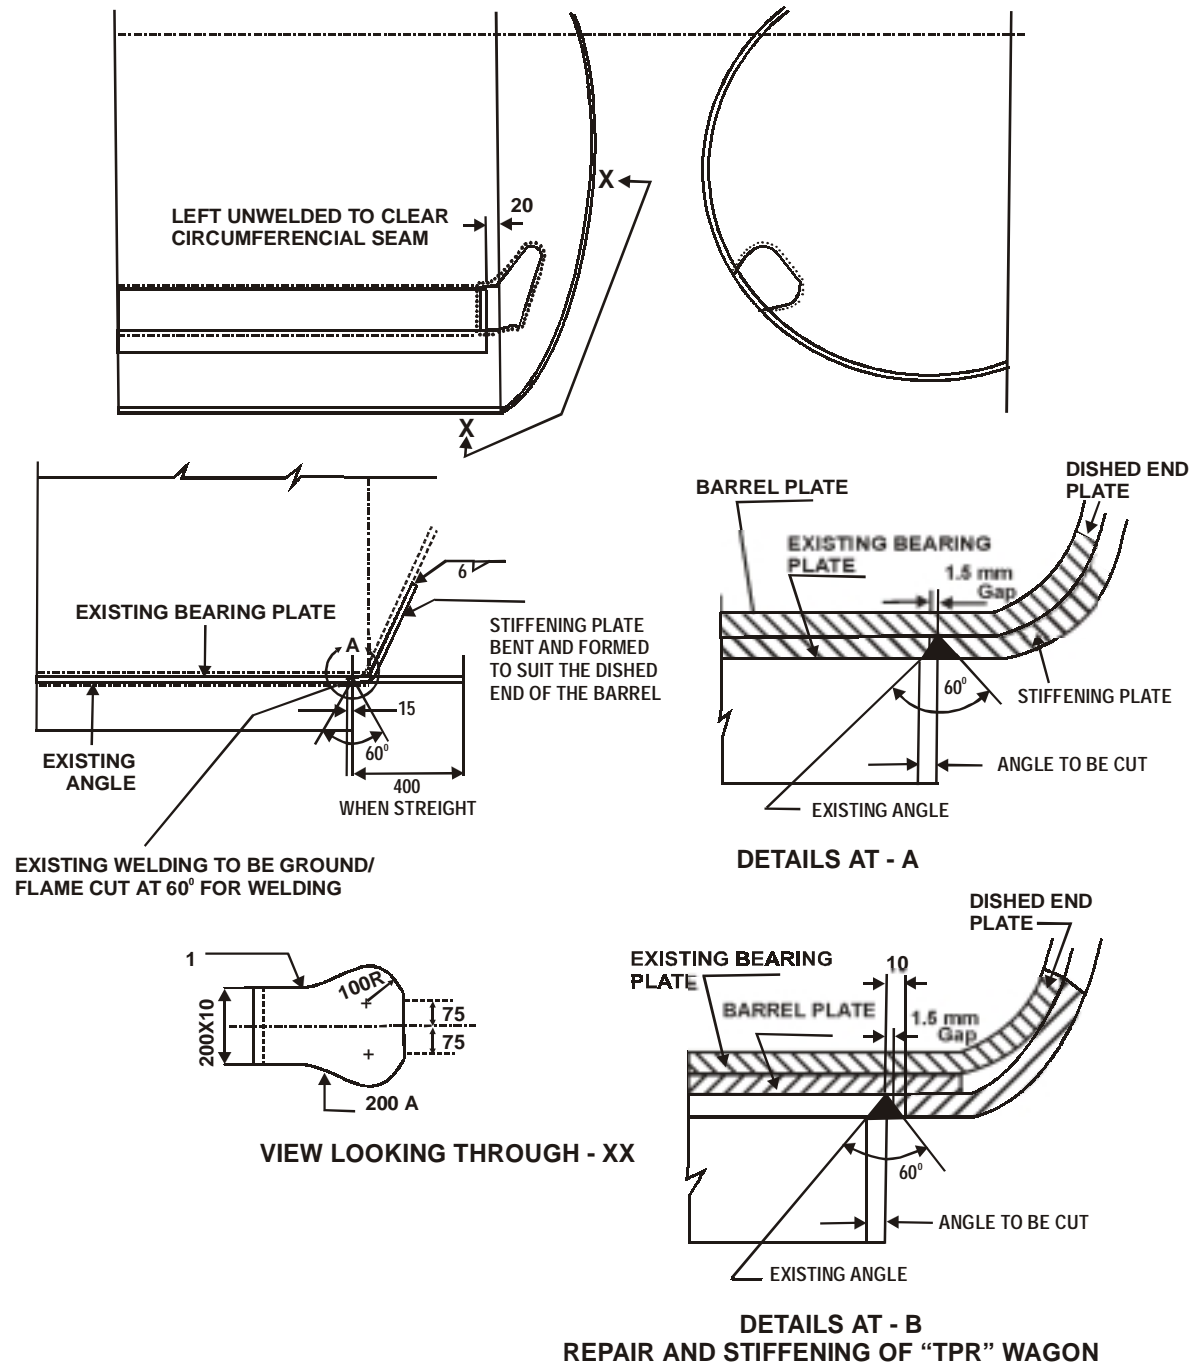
TANK WAGON WITH BEARING PLATE OUTSIDE
